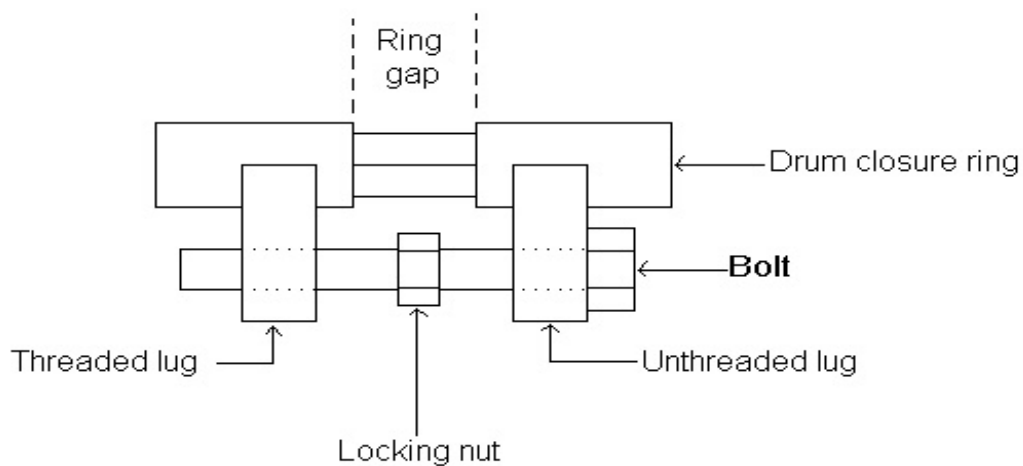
Installing Bolt and Locking Nut into Bolt Closure Ring
